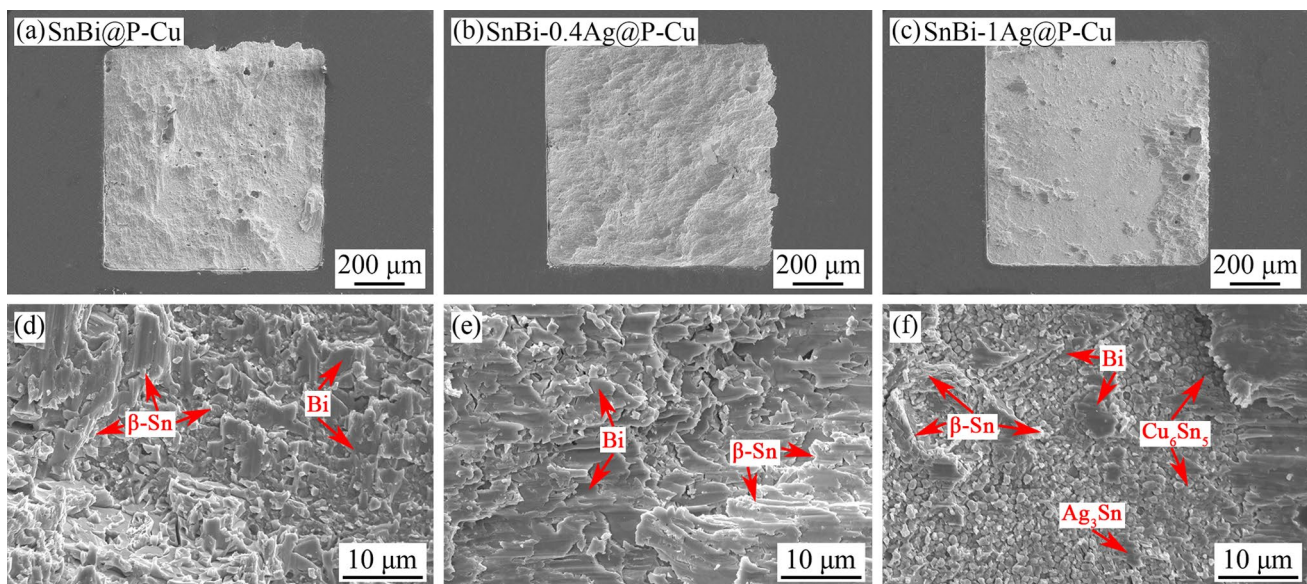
Shear fractures of solder@P-Cu composite solder joints. a SnBi@P-Cu, (b) SnBi-0.4Ag@P-Cu, (c) SnBi-1Ag@P-Cu. (d–f) magnified morphology of (a–c), respectively
